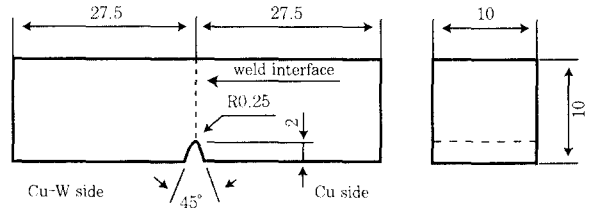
Shape and dimension of impact test specimen(unit : mm)
